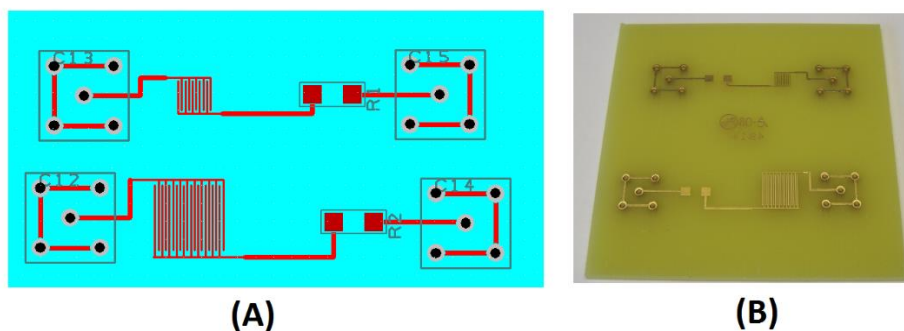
Interdigitated electrodes (A) PCB design (B) Fabricated electrodes
